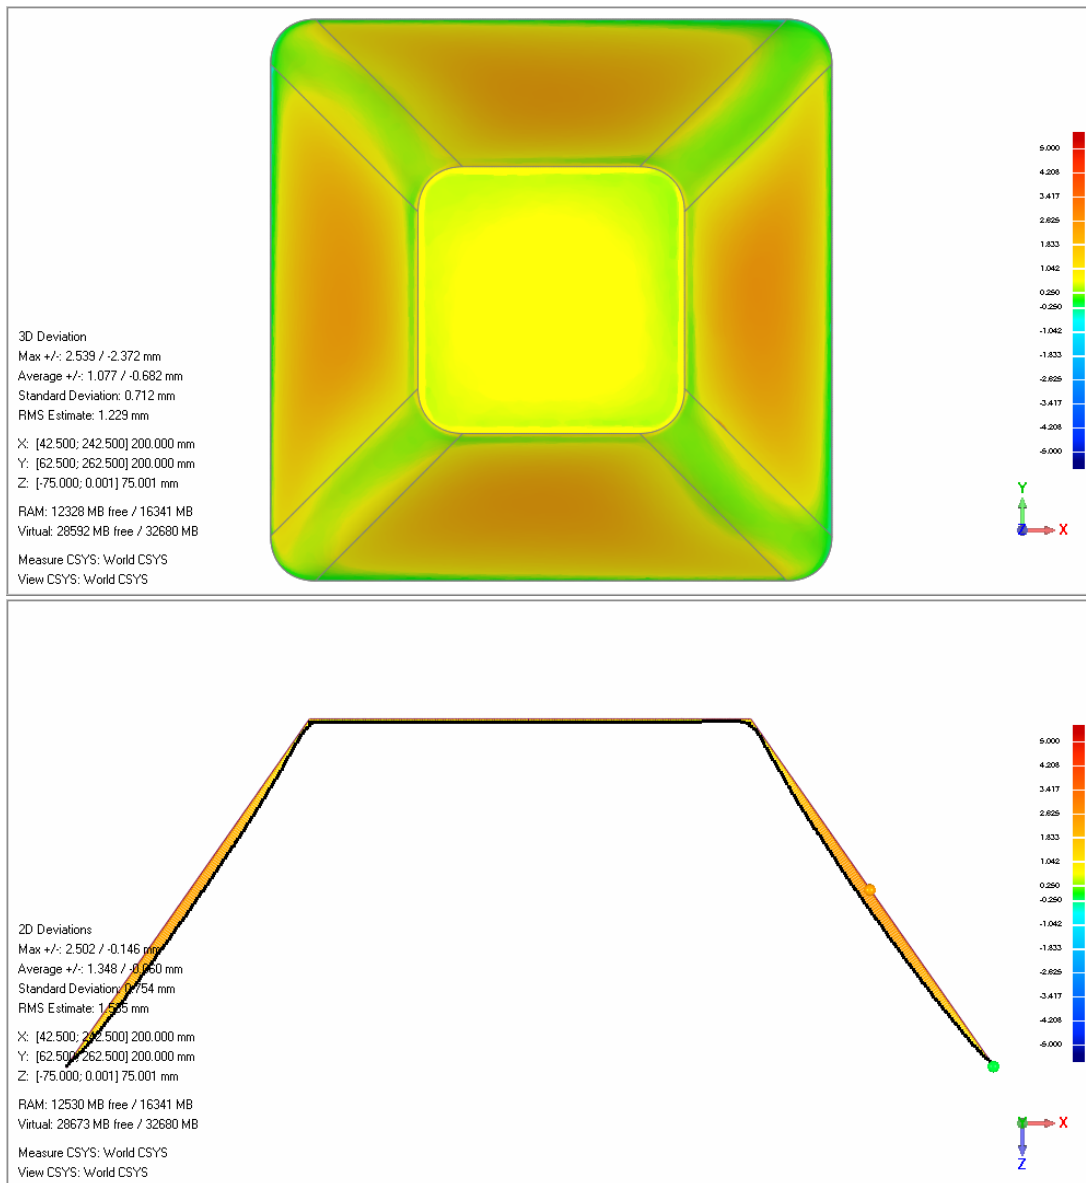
Part T6A geometric accuracy results - top view and cross-section view
